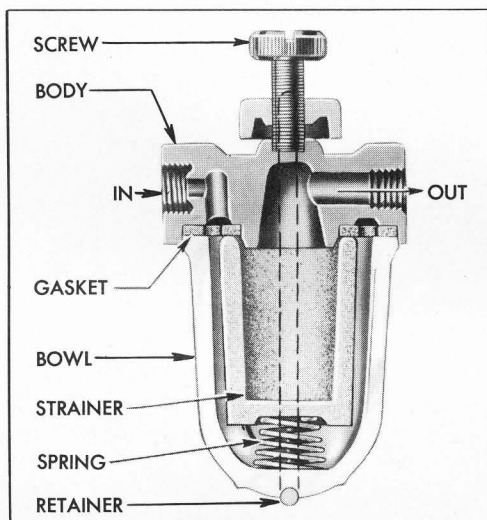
Carter Ceramic Type Gasoline Filter—Sectional View
